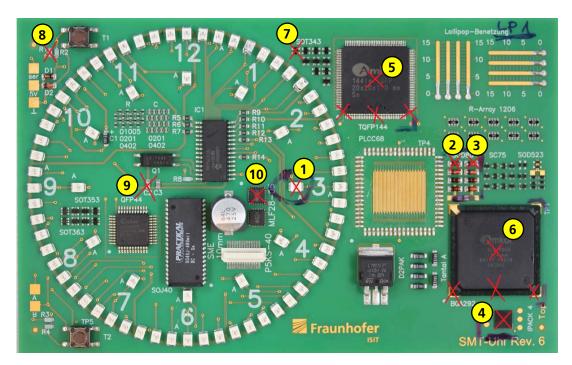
Test board (160 mm x 100 mm) with lead-free soldered parts. The red cross markers describe the load test positions, component numbers are marked by yellow circles.
